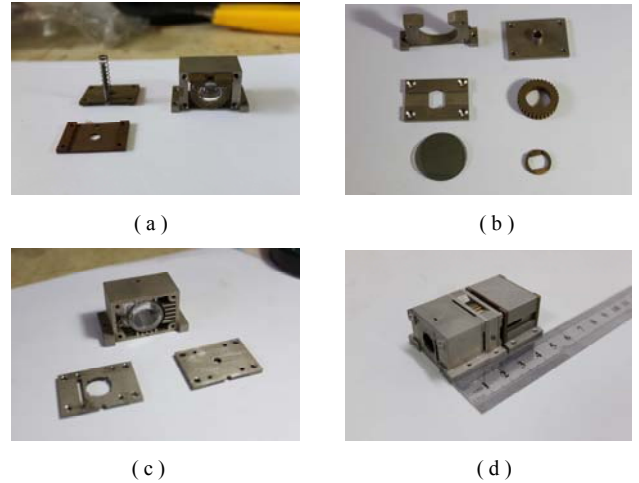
Photograph of the physics package. (a) The first part; (b) The second part; (c) The third part; and (d) the whole physics package.
